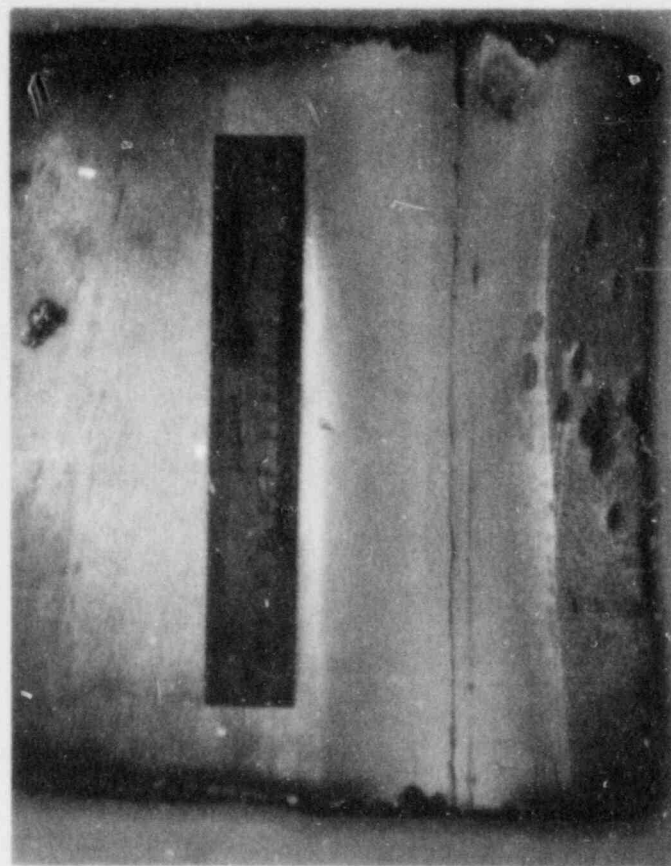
Manifold End Cap of Hatch-2 after Dye Penetration
